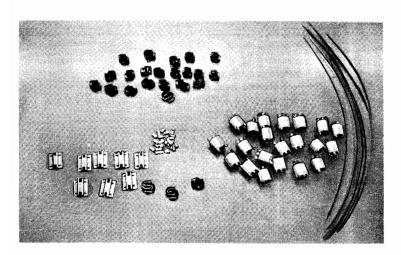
Cores, seals, mounting brackets, coils and bands laid out for assembly
